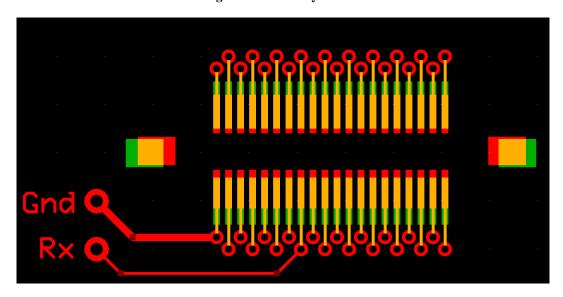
PCB Layout of Touchscreen Connection Board on Host Unit
